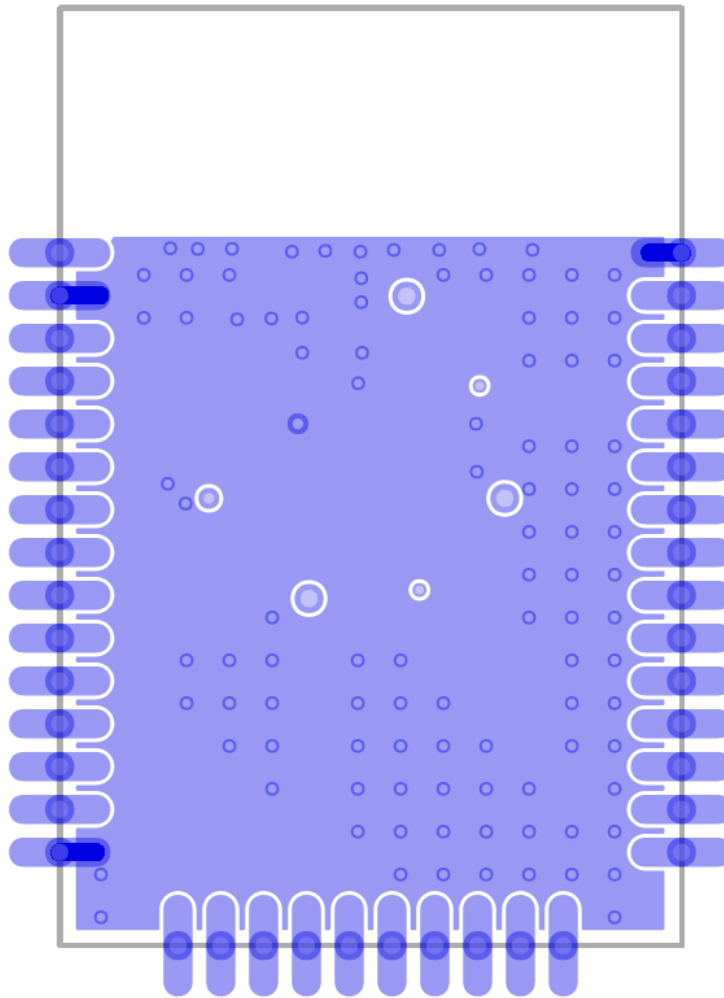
Bottom layer of the QN9083 PCB layout reference design
